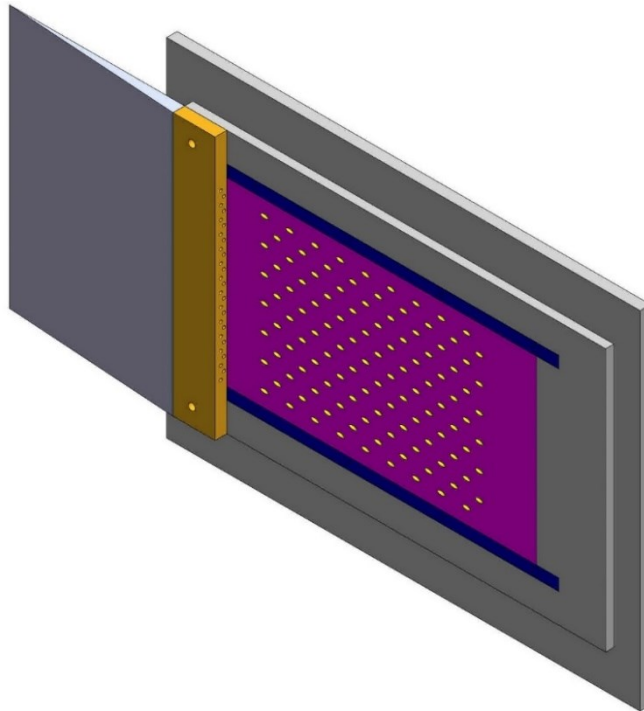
Schematic of the effusion test plate with the machined ring assembly
